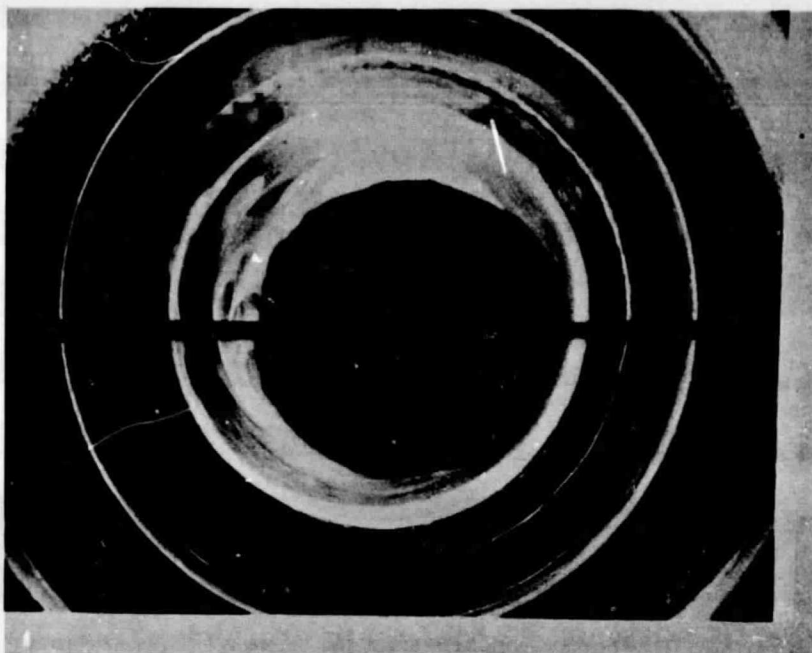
Chuck Assembly and Positioner. Chuck is Mounted to GAC Matched Filter Assembly
